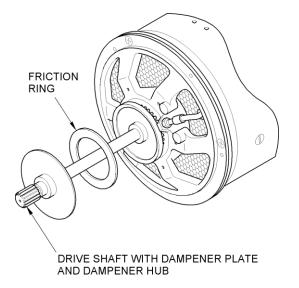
Removing The Drive Shaft, Friction Ring and Dampener Plate
